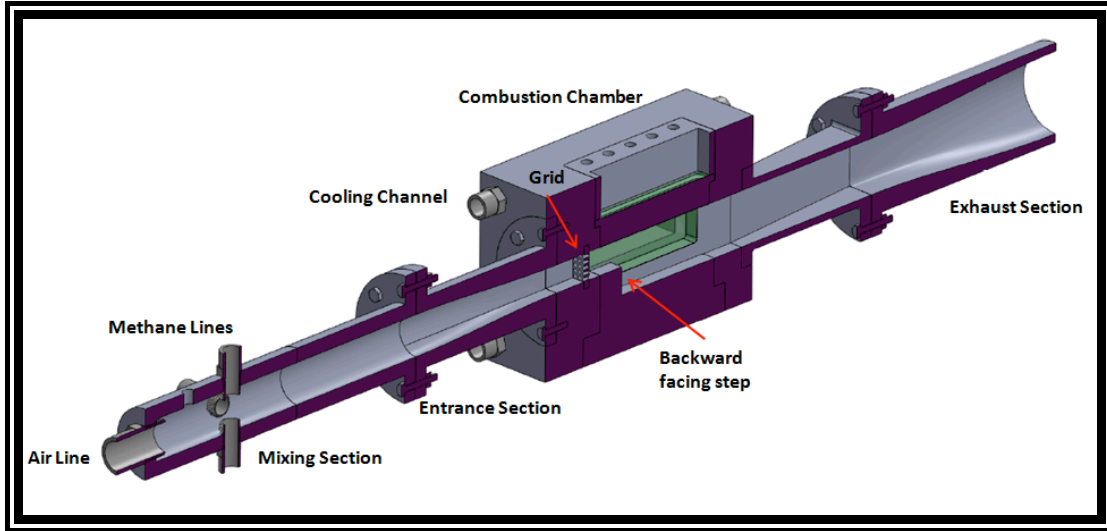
Cross-sectional view of the combustor assembly (flow direction: left – right)
